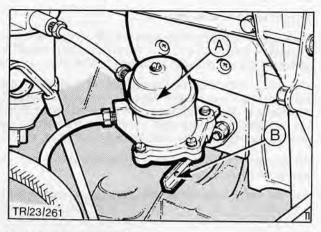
Fuel pump assembly - Lift pump B - Hand prime lever
